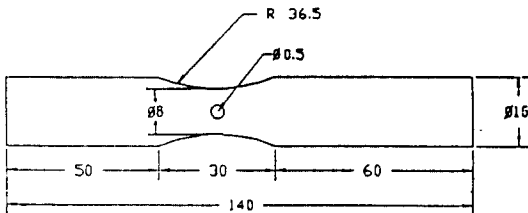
Shape and dimensions of fatigue test specimen (unit : mm)
